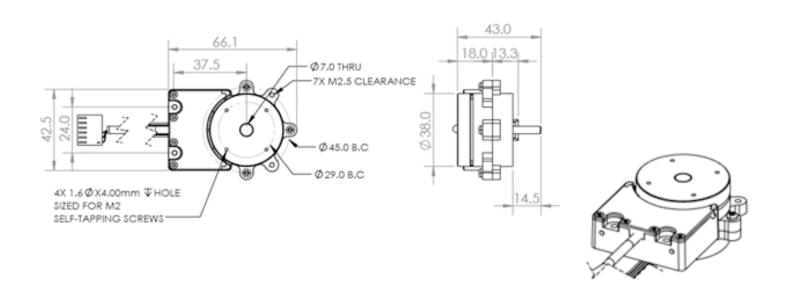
Mechanical drawing (mm) of RBS Solid Shaft Rotary Motor with Installed Encoder
